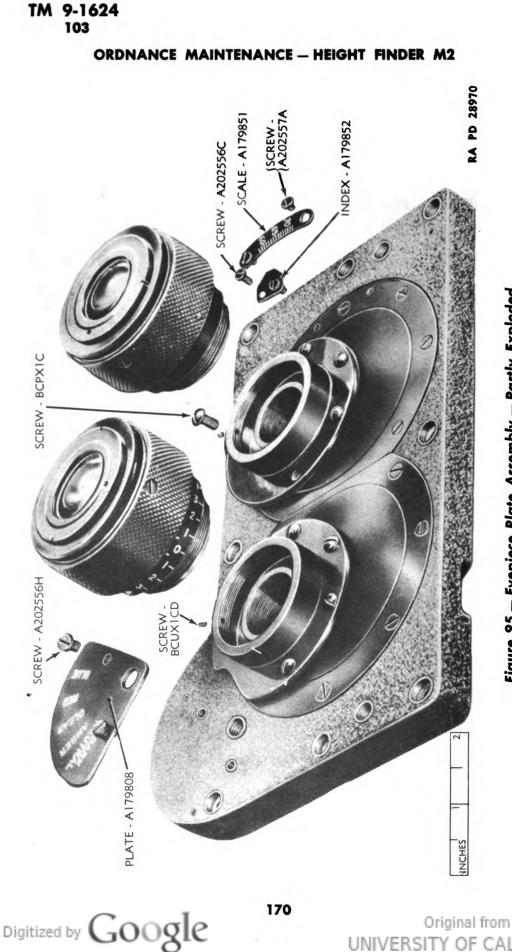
Eyepiece Plate Assembly — Partly Exploded
